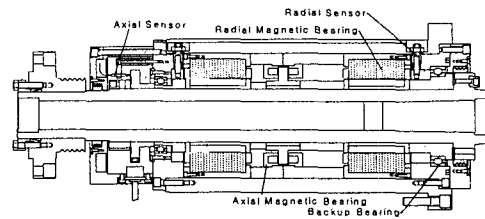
Spindle of CNC lathe is applied with magnetic bearing
